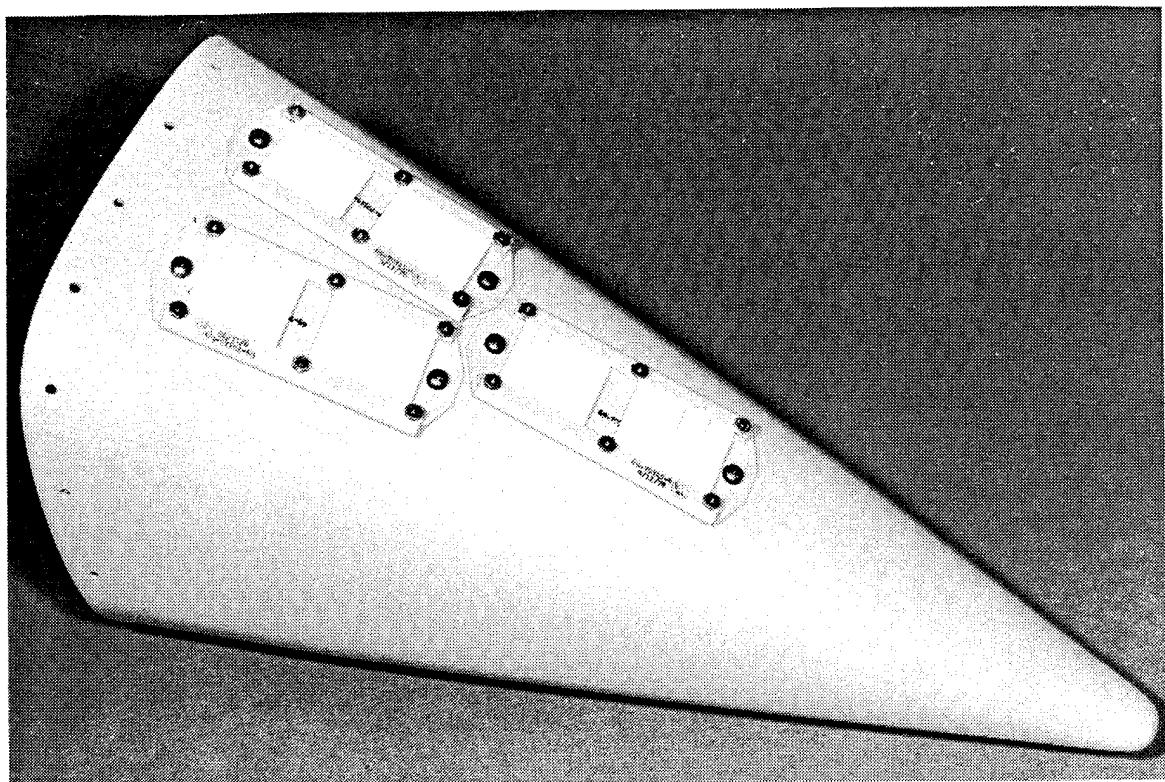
Tailcone With Shear and Flexure Specimen Fixtures Attached
